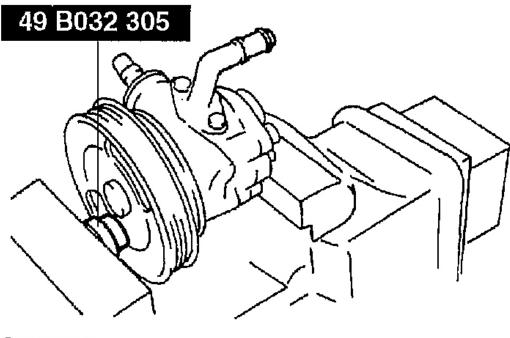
Disassembling Power Steering Oil Pump Courtesy of MAZDA MOTORS CORP.
